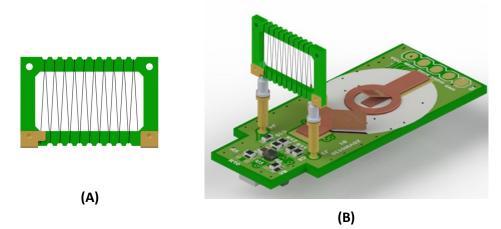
Illustration of the biosensor PCB. (A) Biosensor PCB with metallic electrodes (B) The biosensor PCB is connected to the main controller PCB through a press-fit mechanism as shown in the schematic diagram
